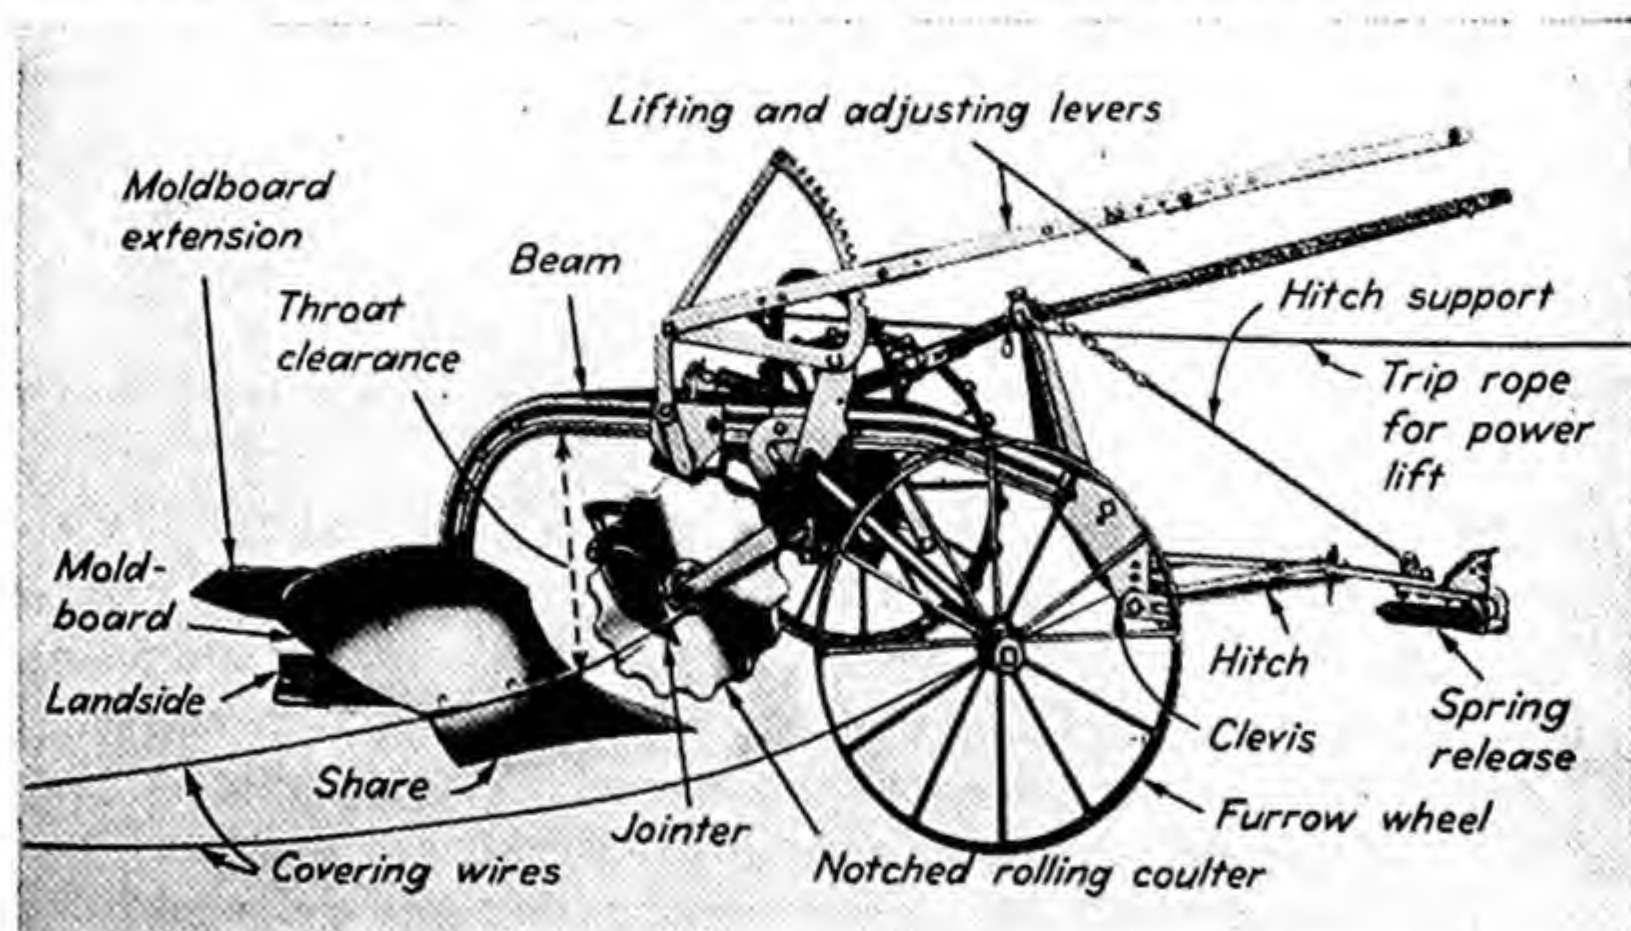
Pull-type single-bottom moldboard plow complete with attachments.
